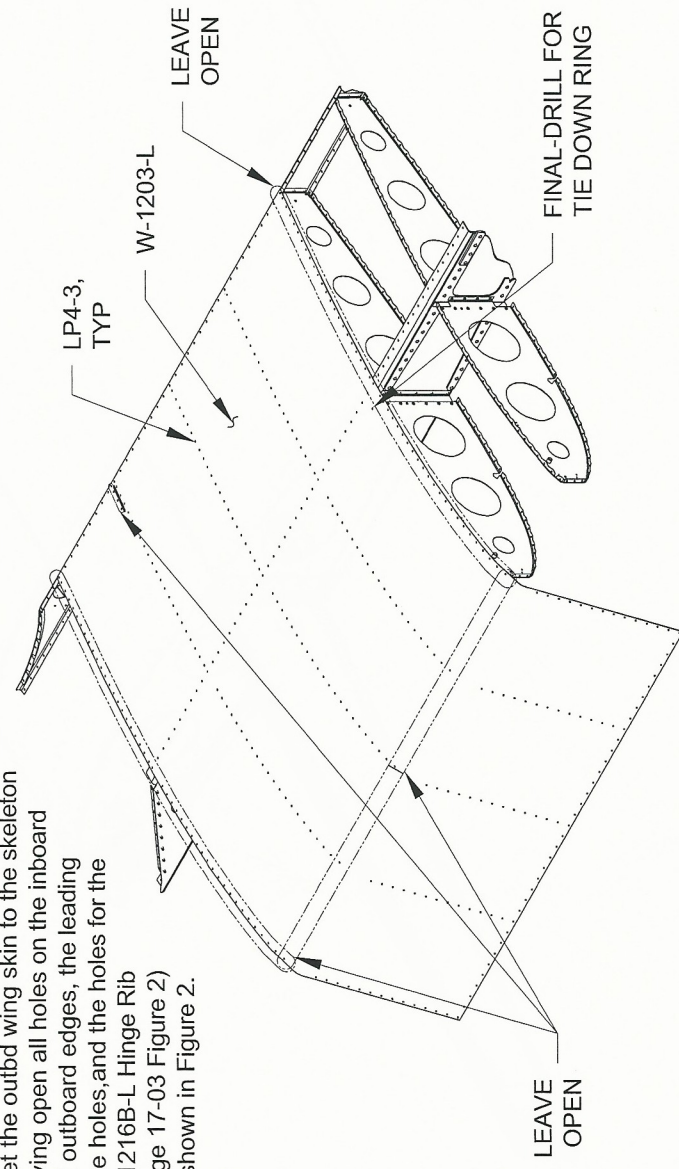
ATTACHING OUTBD WING SKIN (LEFT WING SHOWN)
